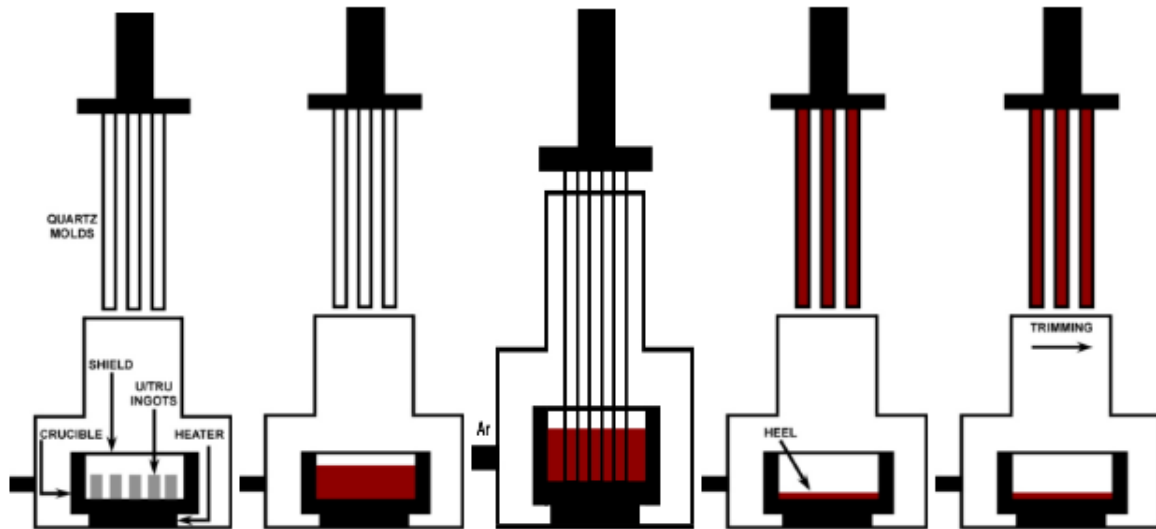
Injection casting process to fabricate metal fuel slugs. U and TRU are melted with zirconium to form metal feedstock for slug fabrication by injection casting and eventual fuel element assembly. The metal feedstock is first melted in a graphite crucible, and a vacuum is induced to inject the molten alloy into quartz molds. The ‘heel’ is a coating of metal that will remain on the crucible. The molds are then sheared and broken to obtain slugs. The sheared casting ends are called the ‘scrap.’ The crucible will suffer from eventual wear and is a waste stream, along with the quartz molds. The scrap, as well as the heel, will have to be recovered and accounted for prior to disposal.
